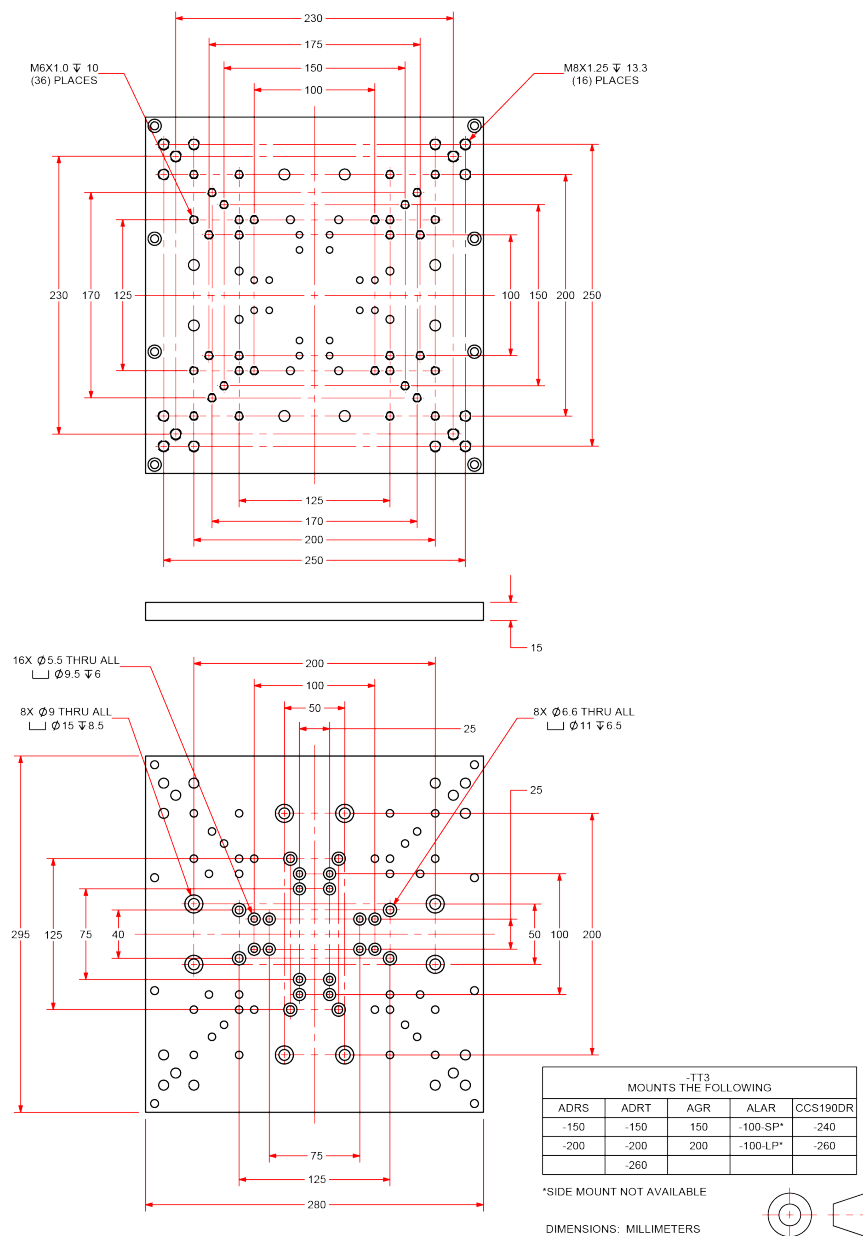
PRO280SL/SLE Accessory Tabletop Dimensions (-TT3/-TT6 Option)
